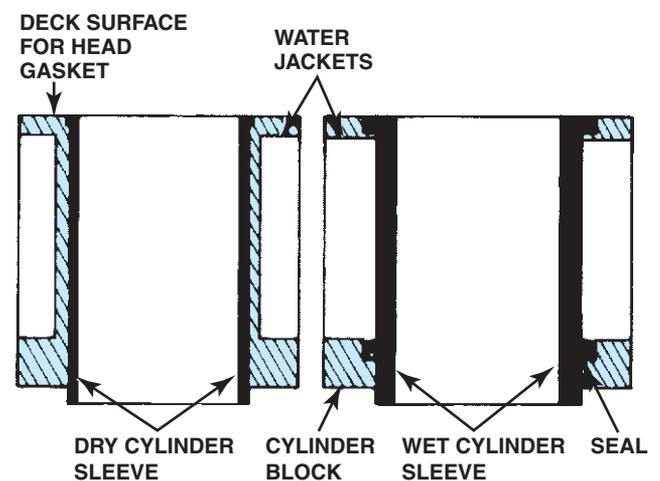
A dry sleeve is supported by the surrounding cylinder block. A wet sleeve must be thicker to be able to withstand combustion pressures without total support from the block.
